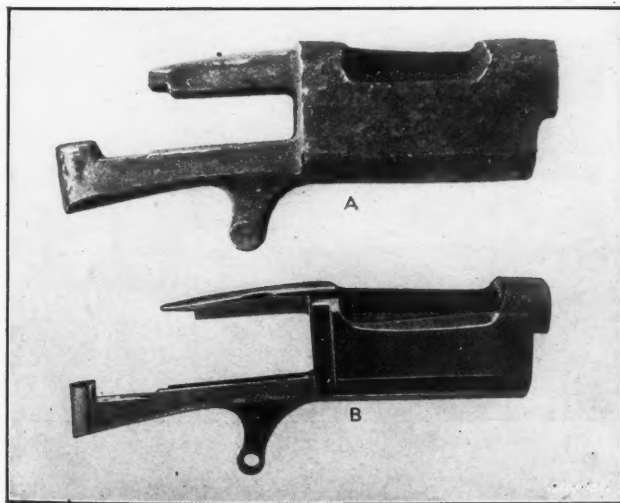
(A) Drop-forging for Receiver; (B) Finished Receiver
